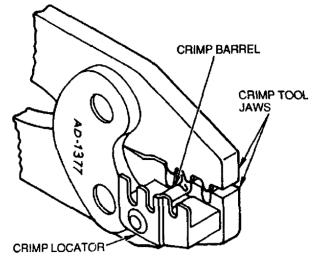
Inserting Crimp Barrel in Crimp Tool, MIL-DTL-22520/37.
